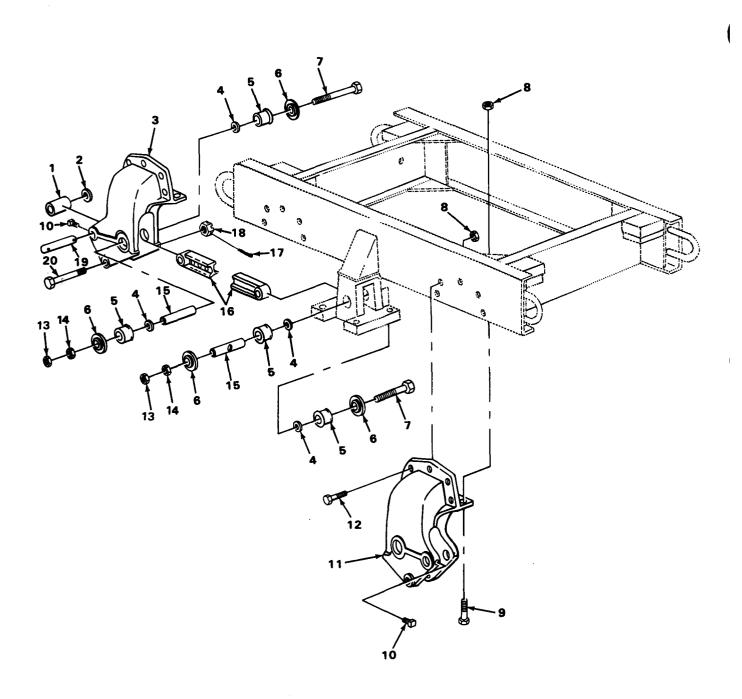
SUSPENSION SPRING MOUNTING BRACKETS.
